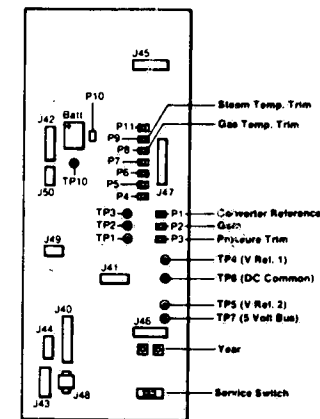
TEST POINT AND POTENTIOMETER LOCATIONS: Main Printcon PC Board.
